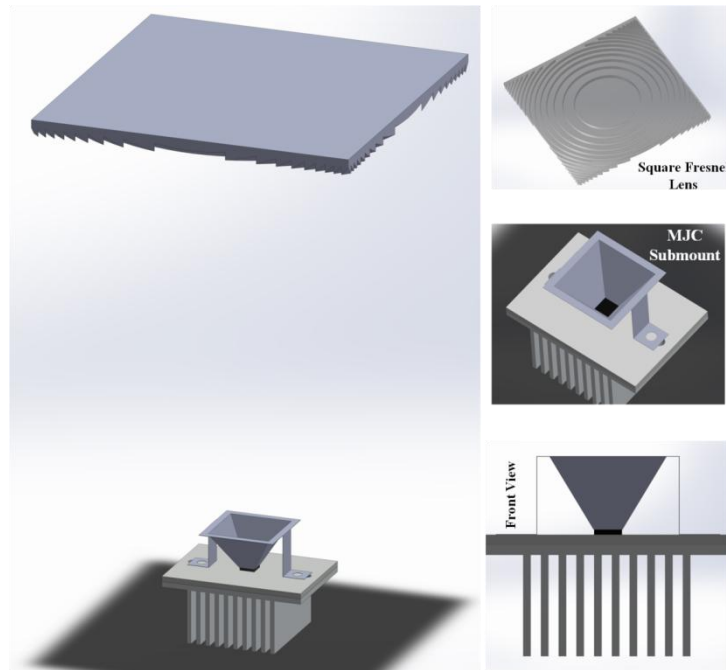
Design Model of Fresnel Lens-Reflective Homogeniser Concentrating Assembly
